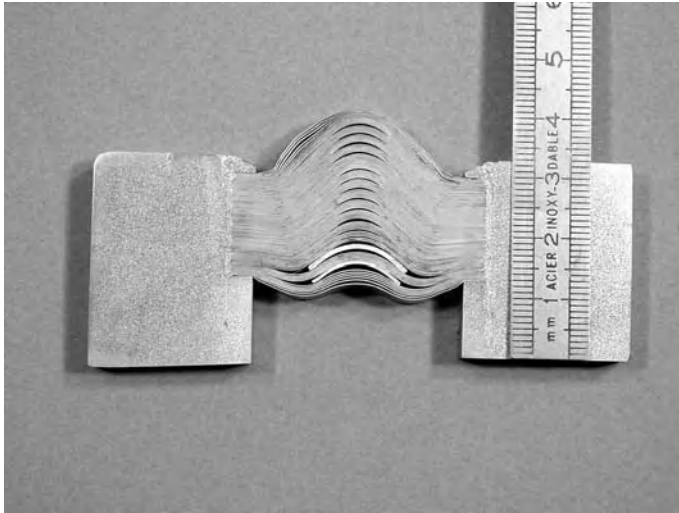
Electron beam welding of a copper part (Institut de Soudure document)
